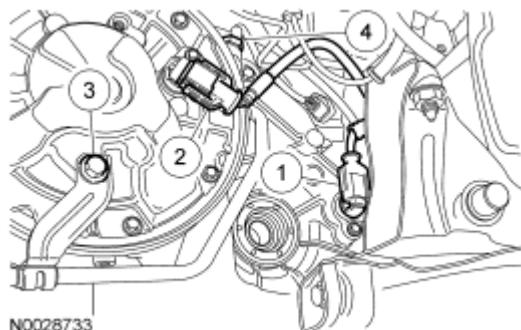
Fluid Cooler Tube, Electrical Connectors & Bracket
